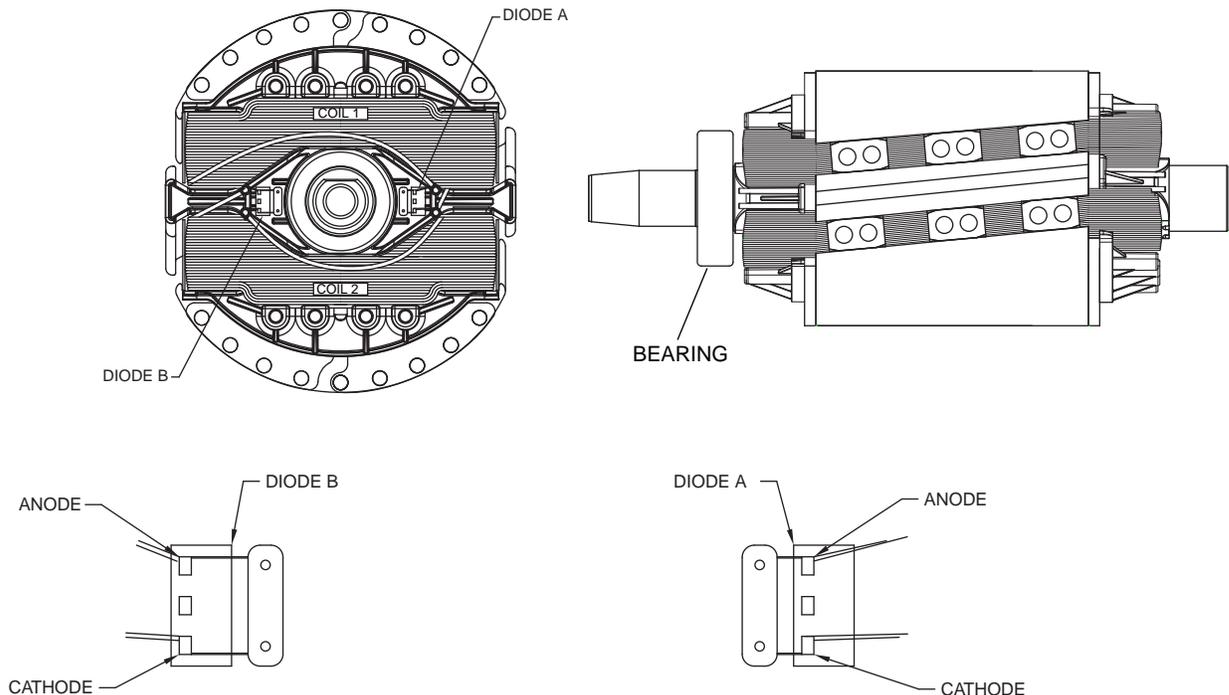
The 2-Pole Rotor Assembly 8/10kW
